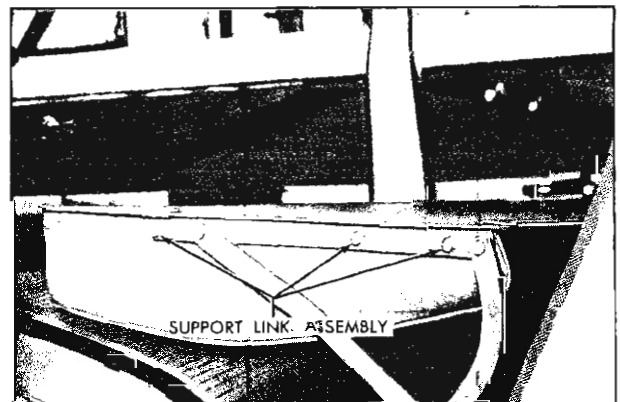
Folding Seat Back Mounting Support Link Assembly
